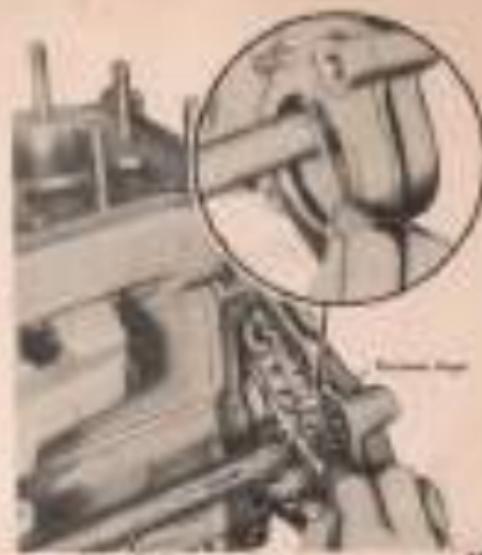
Assembly Bearing Housing (Lock washer over lock nut)
